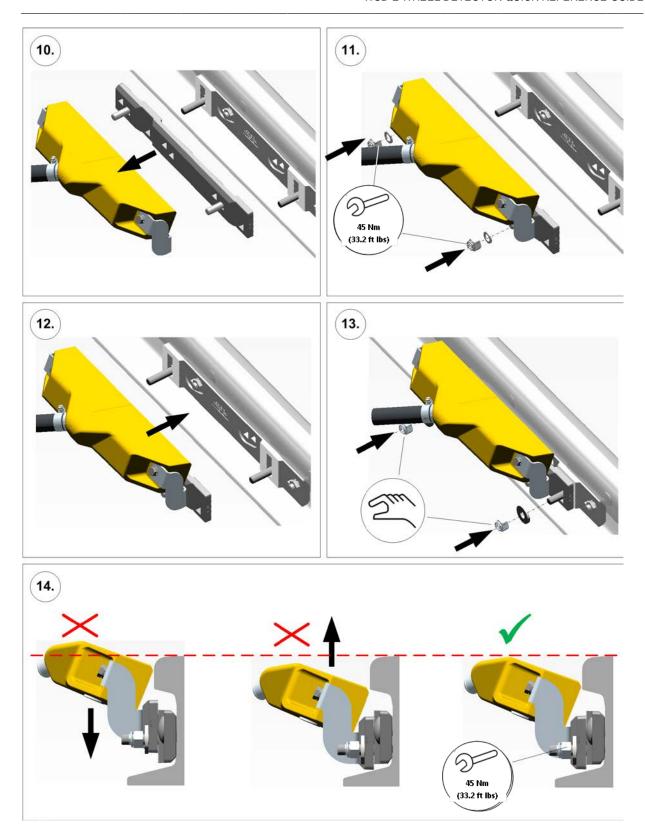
Attaching Bolts on Wheel Detector for Option A3 Mount (Part 2)
